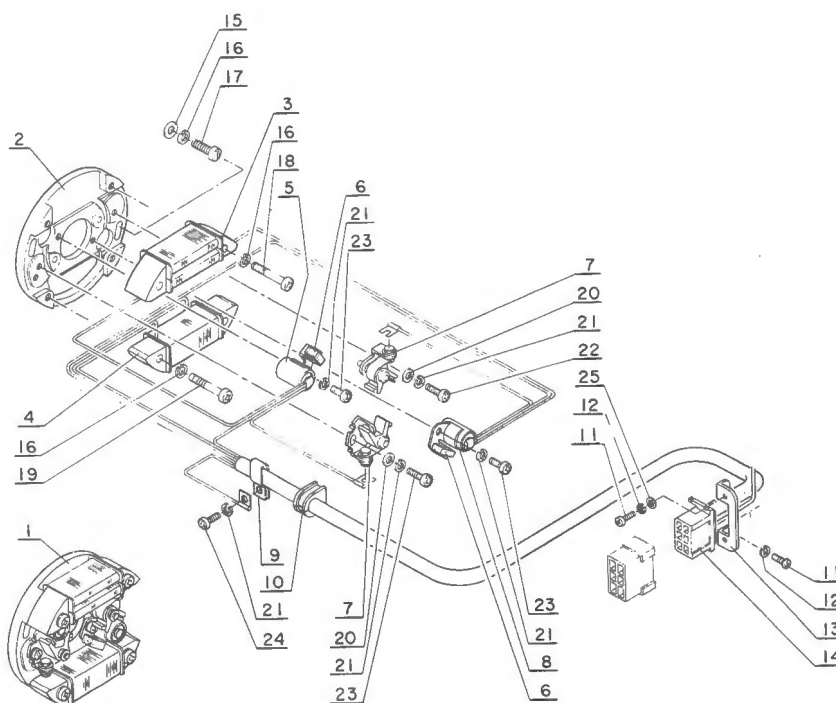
COIL PLATE ASSY. — EXPLODED VIEW
